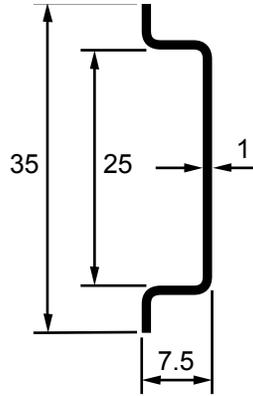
DIN Rail Cross Section Dimensions (Units in mm)
